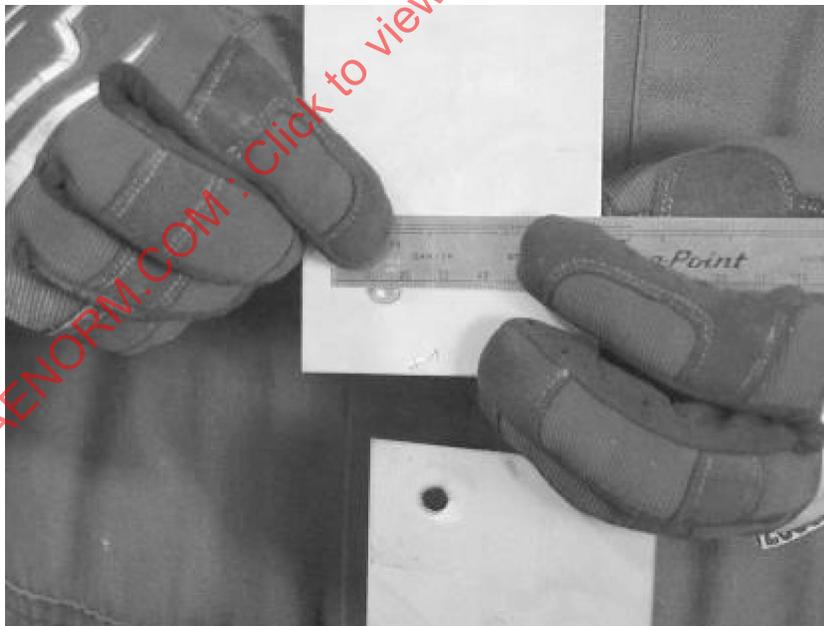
THE DIAMETER OF THE WELD NUGGET MUST BE EQUAL TO OR LARGER THAN 5 mm
